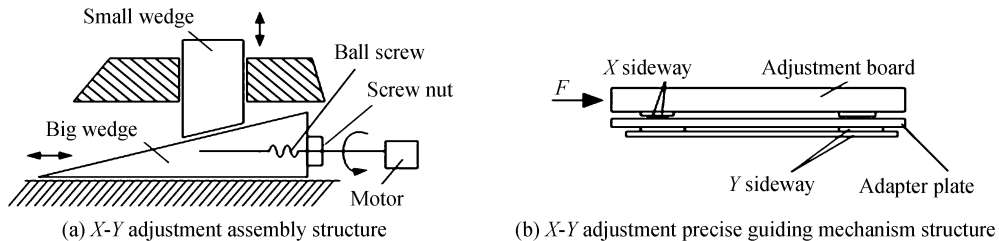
X - Y adjustment assembly structure and precise guiding mechanism structure
